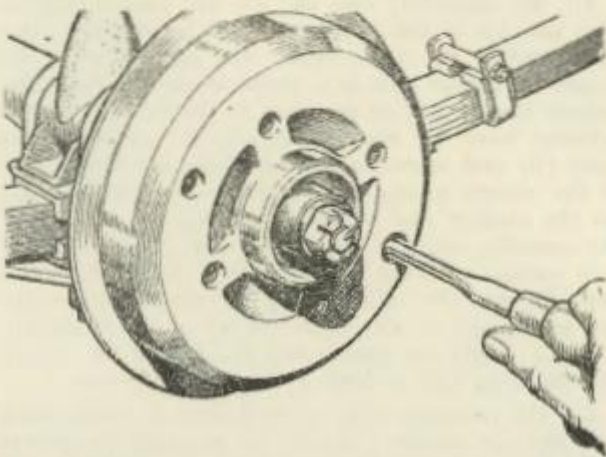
The rear brake-shoes are adjusted with a screwdriver through one of the holes in the brake-drum in a similar manner to the front brakes, but there is only one adjuster for both shoes and this adjusts the hand brake at the same time.
